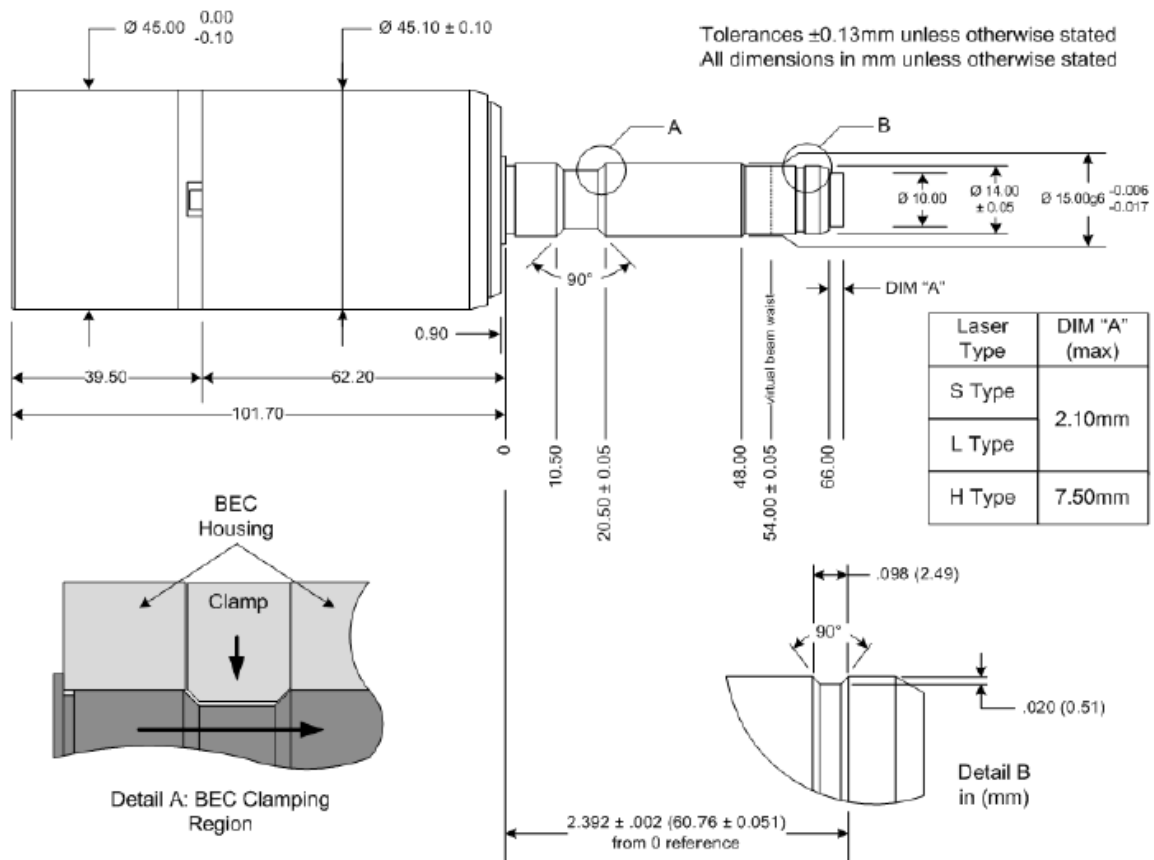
Water Cooled G4 10W – 40W Mechanical Drawing
